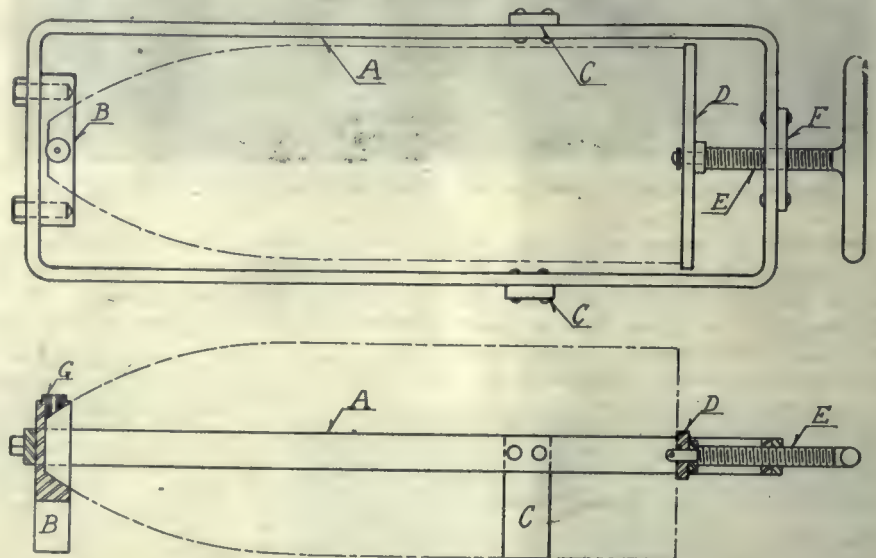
DRILL JIG FOR GRUB SCREW HOLE.
